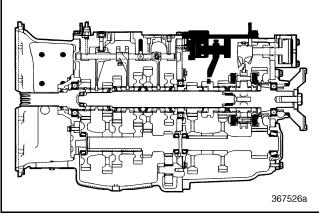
Rear Case Shift Cover Component Locator (T313L/T318L Shown)
